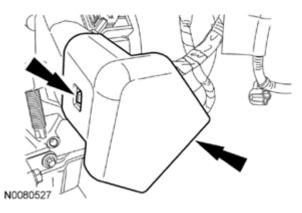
Locating Locking Tab And Generator Air Duct Courtesy of FORD MOTOR CO.
